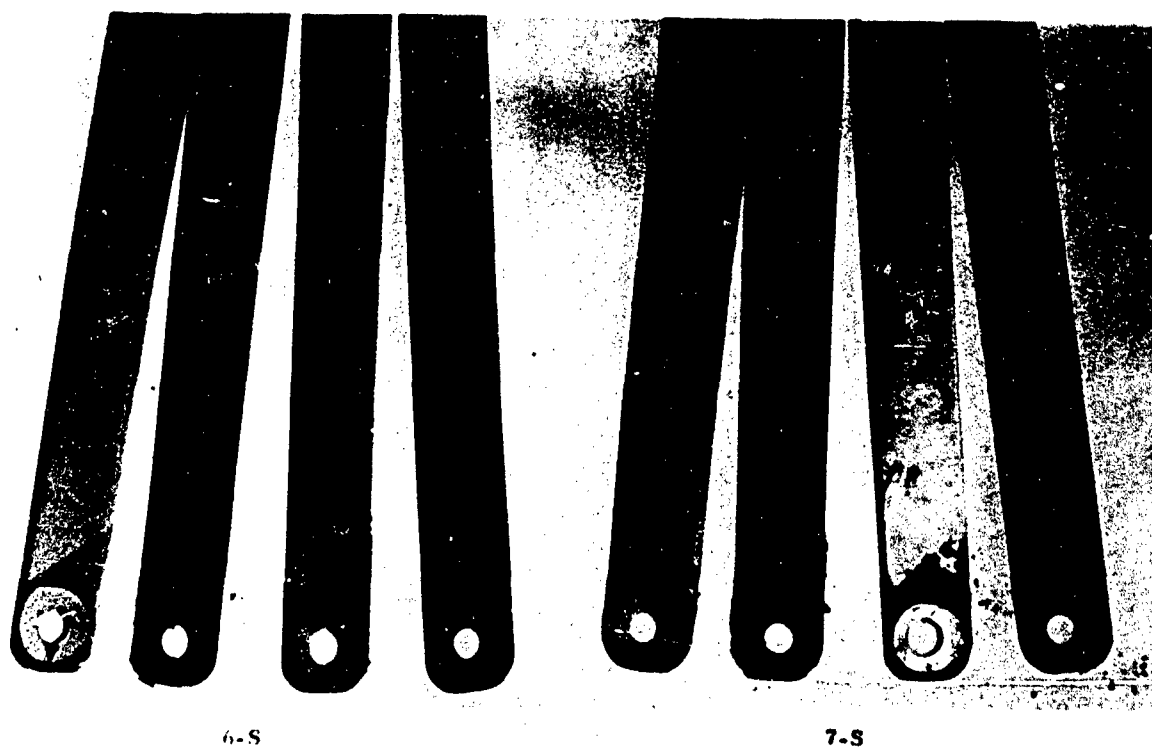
SPECIMEN ASSEMBLIES 6S AND 7S
